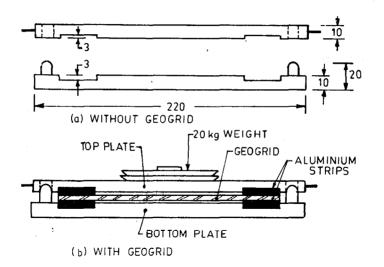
TYPICAL ASSEMBLY OF JIG PLATES
